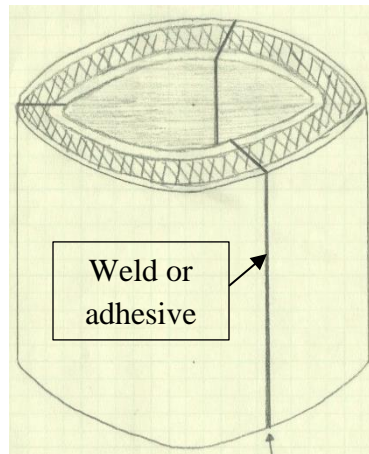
Straight joint weld (1a) and straight joint adhesive (1b)
